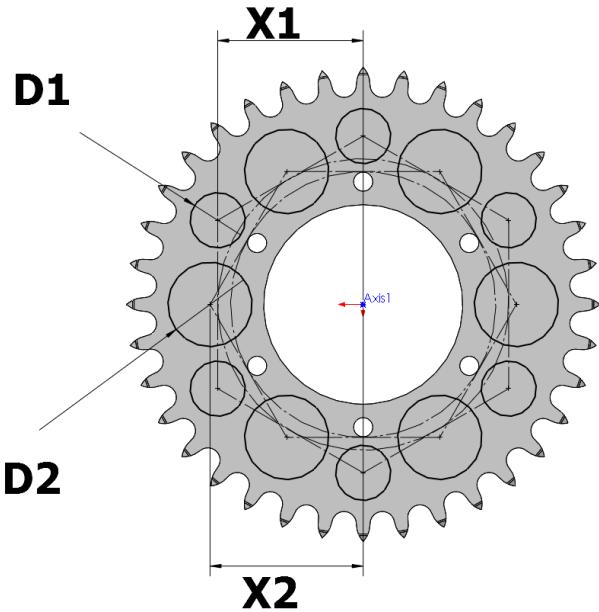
Pocketing geometry, and dimensions which will be modified.
